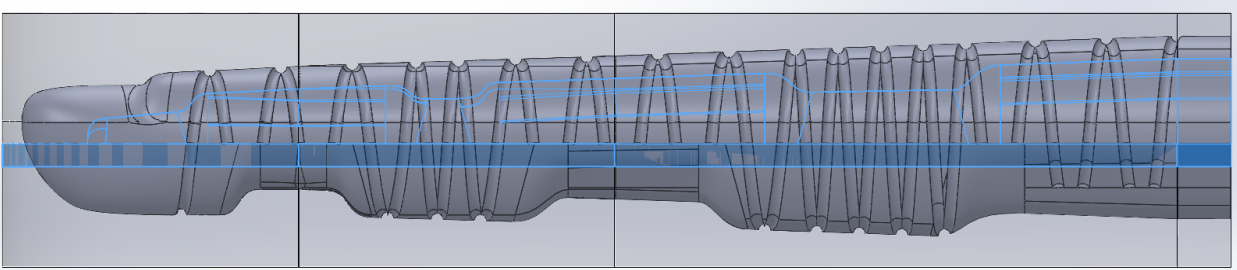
Finger mold. Outlined part in blue is the mold piece that determines the interior shape of the top half of the finger.
